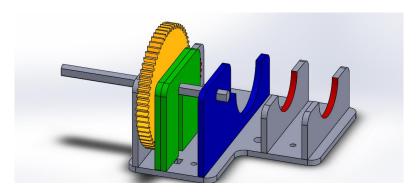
The 'square spacers' designed to make gearbox assembly quicker (shown in green).
